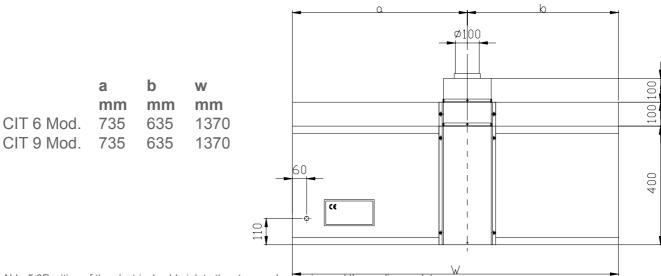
Position of the electrical cable inlet, the steam exhaust pipe and the appliance plate.
